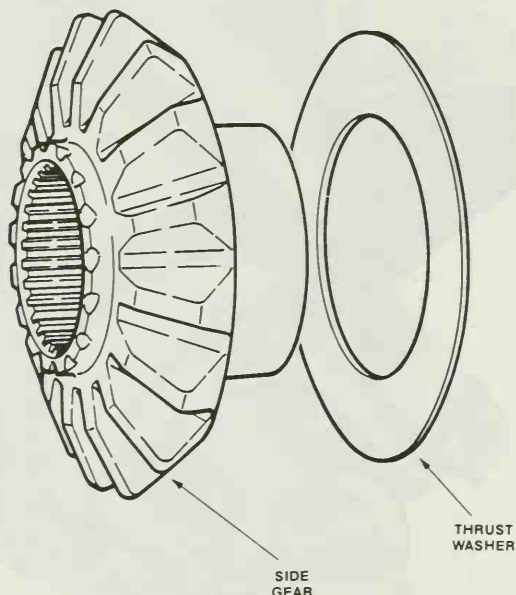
If clearance is excessive, replace the side gear thrust washers. (American Motors Corporation)
